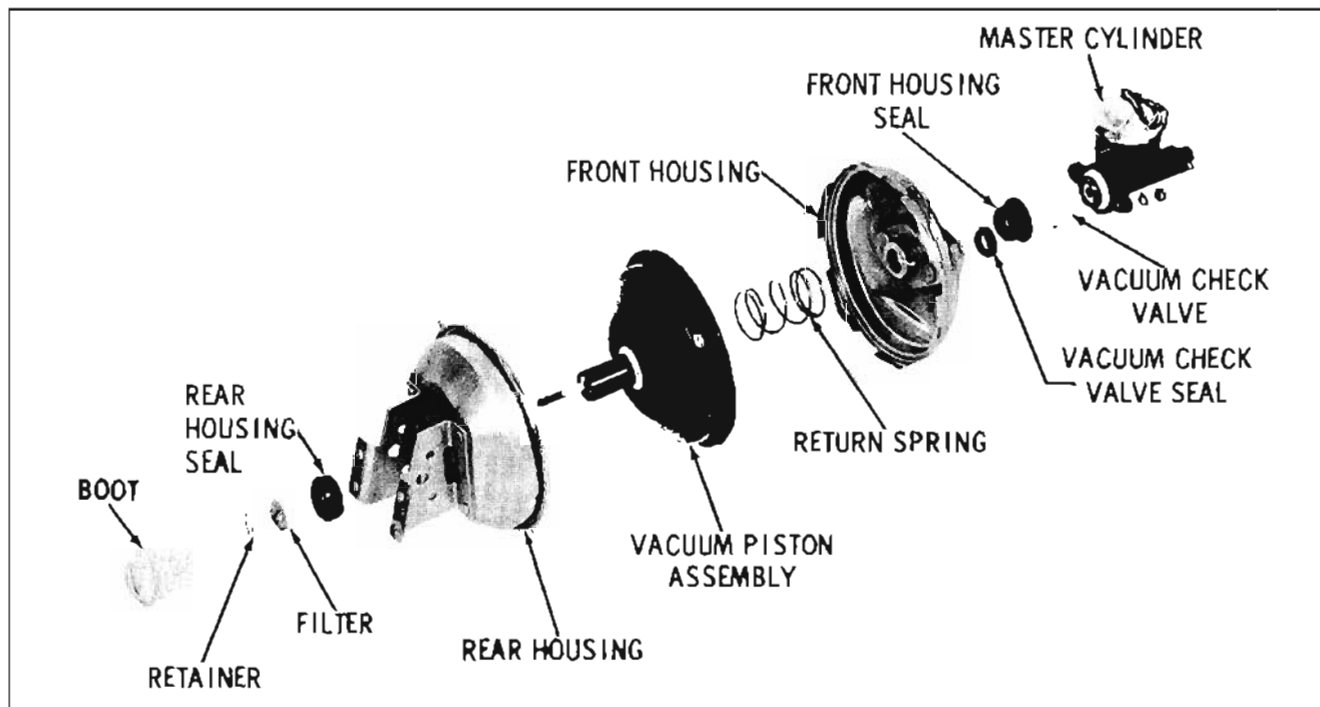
Moraine Power Brake Assembly (30, 31 & 32 Series)
